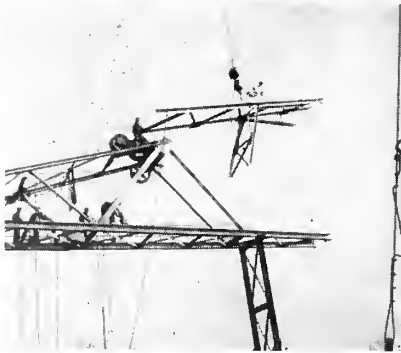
Three sections were bolted together to make up the 3492-pound assembly here being positioned for bolting to the boom.
